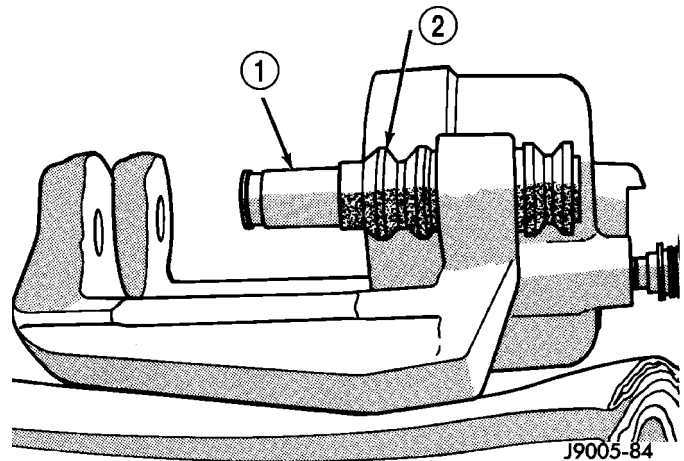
BUSHINGS AND BOOTS INSTALLATION - TYPICAL
